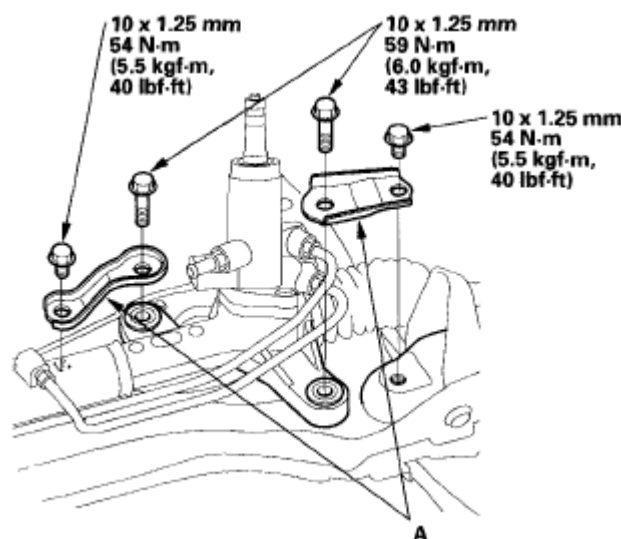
Identifying Stiffener Plates And Gearbox Mounting Bolts (With Torque Specifications)
